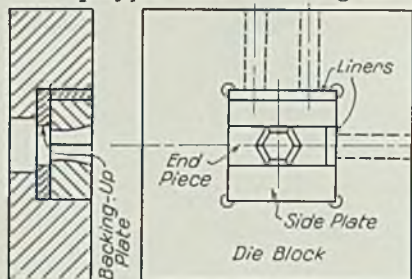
Sketch showing types of cold drawing dies. From paper of J. E. Beck
